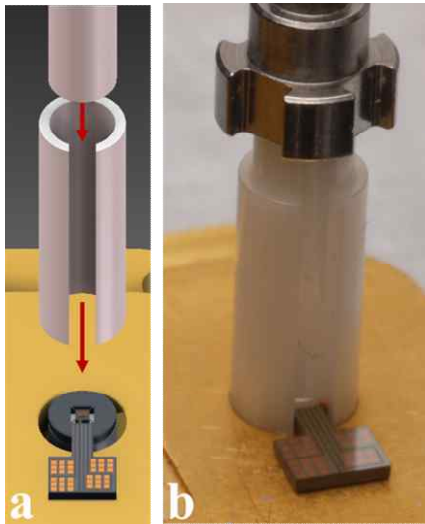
(a) Assembly drawing showing alignment of the fiber core to the center of the radiometer. (b) Picture showing aligned radiometer.
